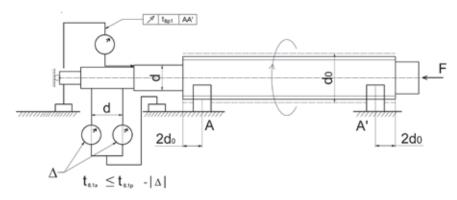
Measurement of the axial run-out $t_{8.1}$ of the bearing surfaces
